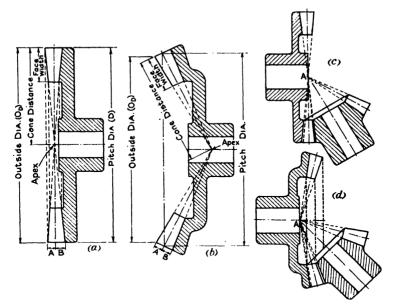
CROWN GEARS AND INTERNAL BEVEL GEARS
